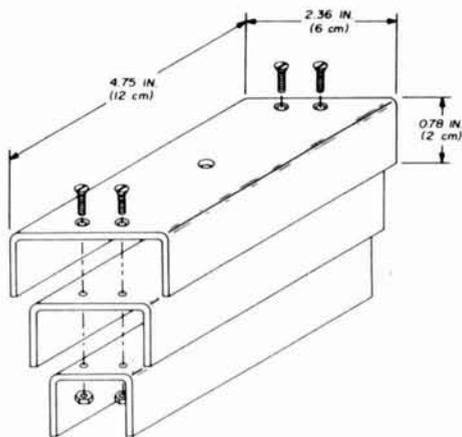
Method of constructing transistor heatsink. Aluminum sheet is formed to approximate dimensions shown, then assembled. Hardware is 4-40 (M3). Top holes are countersunk. Transistor stud clearance is drilled after assembly.
